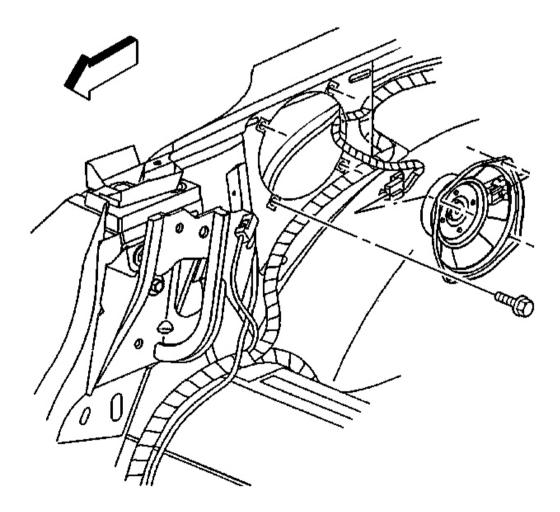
Electrical/Audio Connector At Rear Speaker & Screws Courtesy of GENERAL MOTORS CORP.
